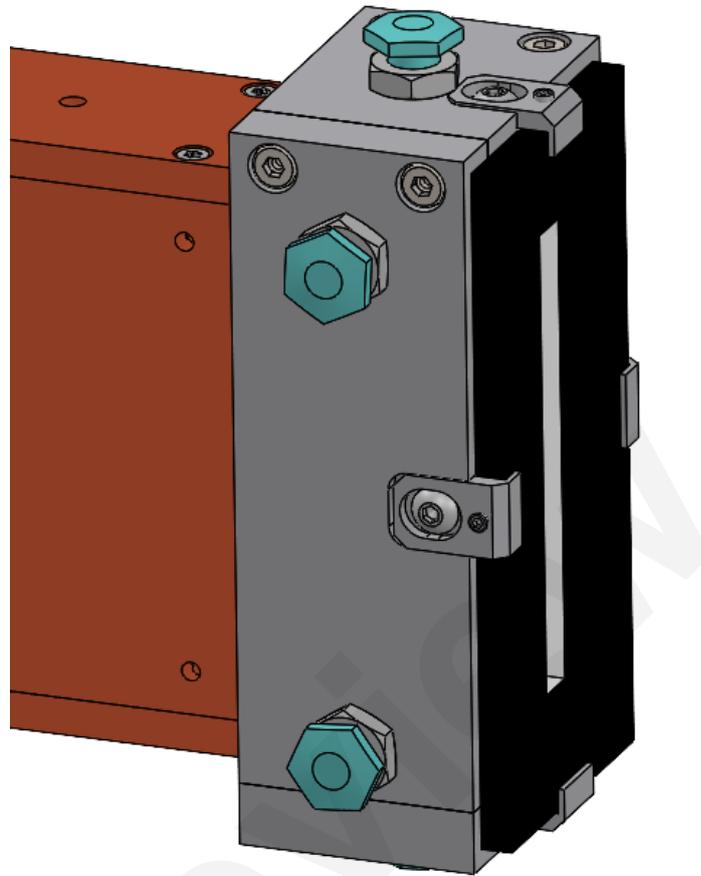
Closeup view of the upstream part showing the adjustable neutron shielding assembly and the connection of the Mirrobor™ shielding mask on the front face.
